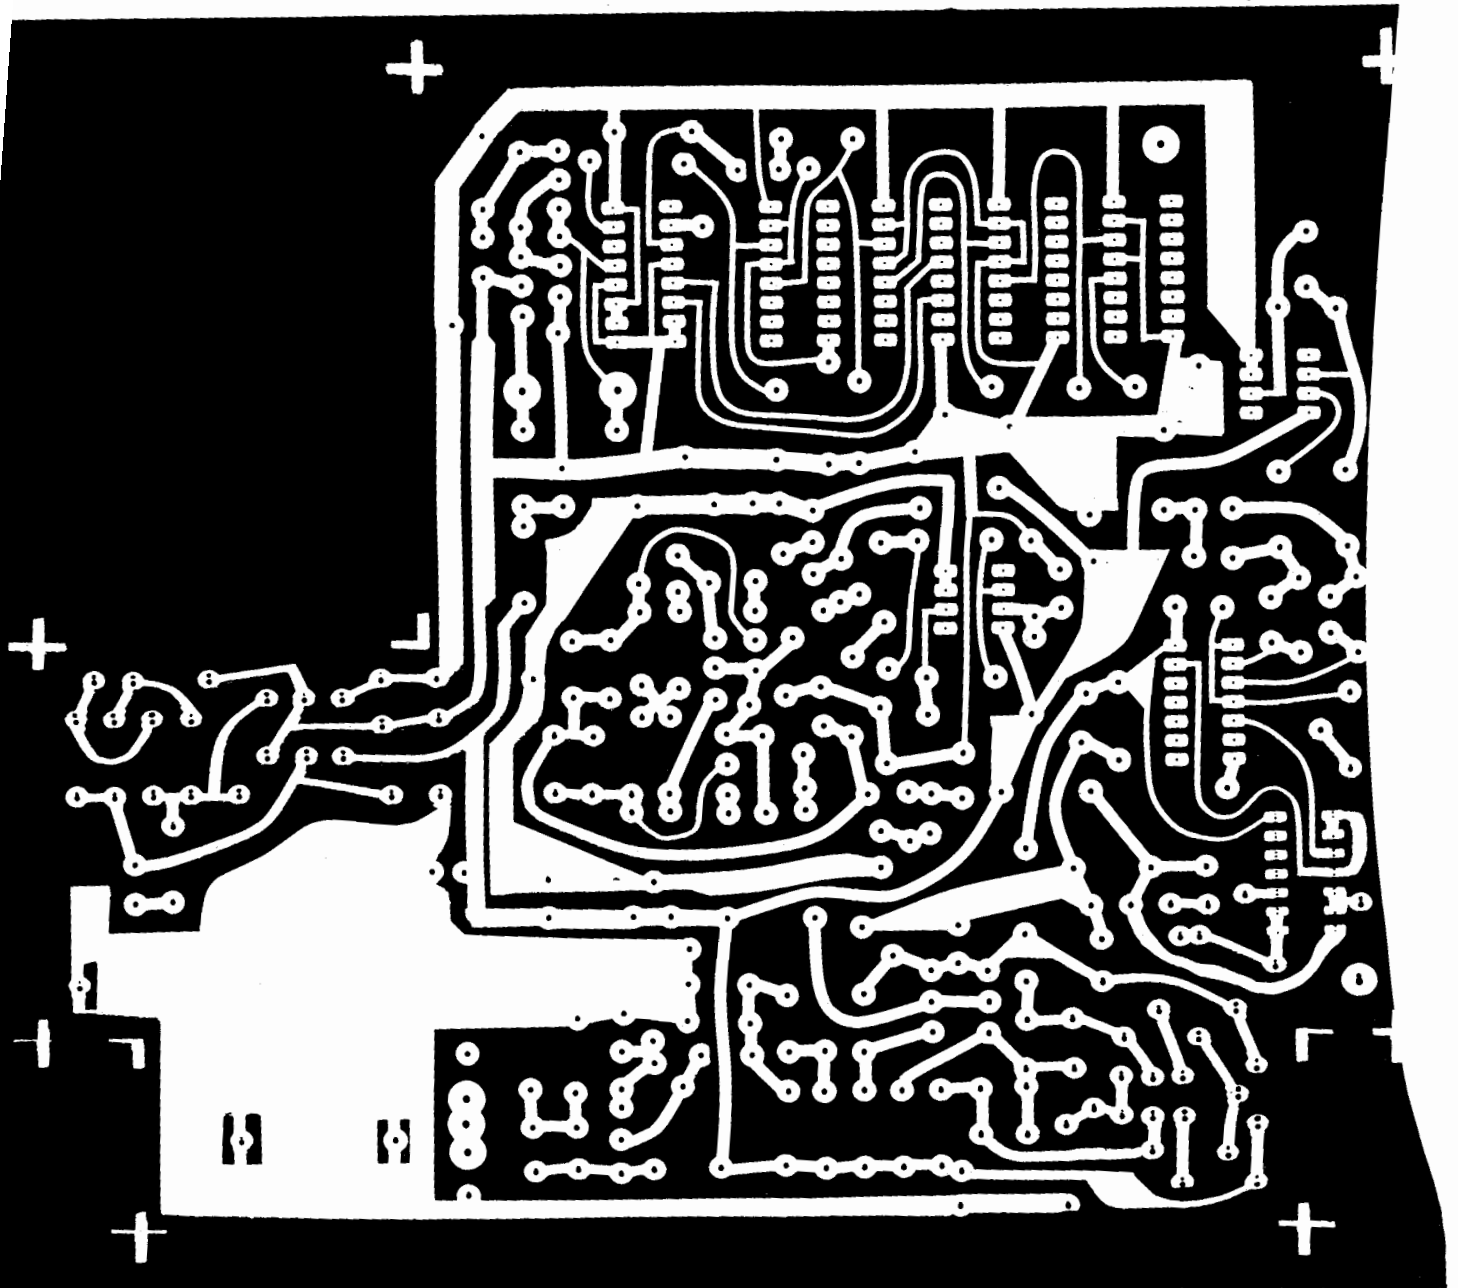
Full-size etching and drilling guide of the project printed-circuit board.
